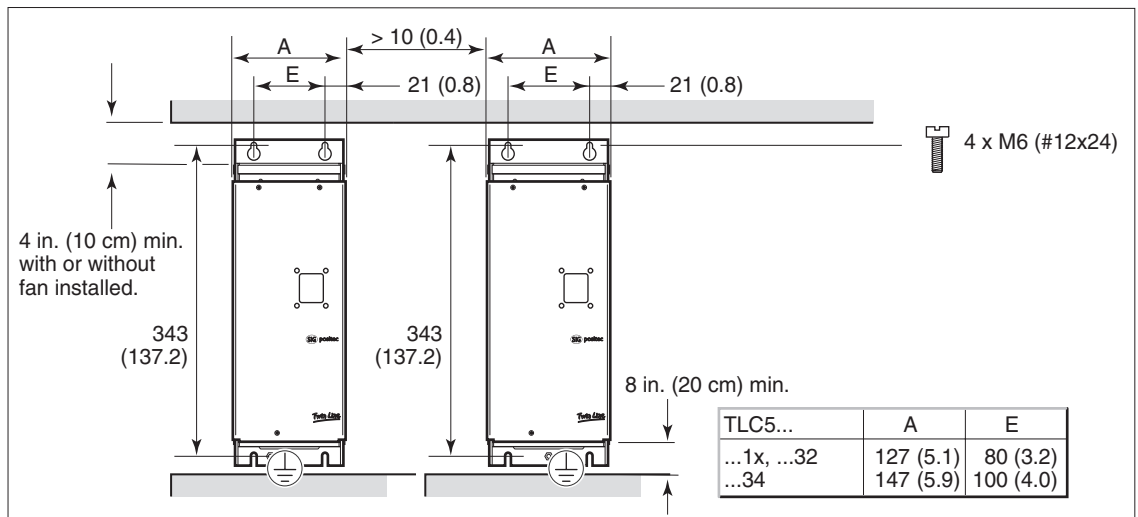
Mounting distances, dimensions in mm (in.)
